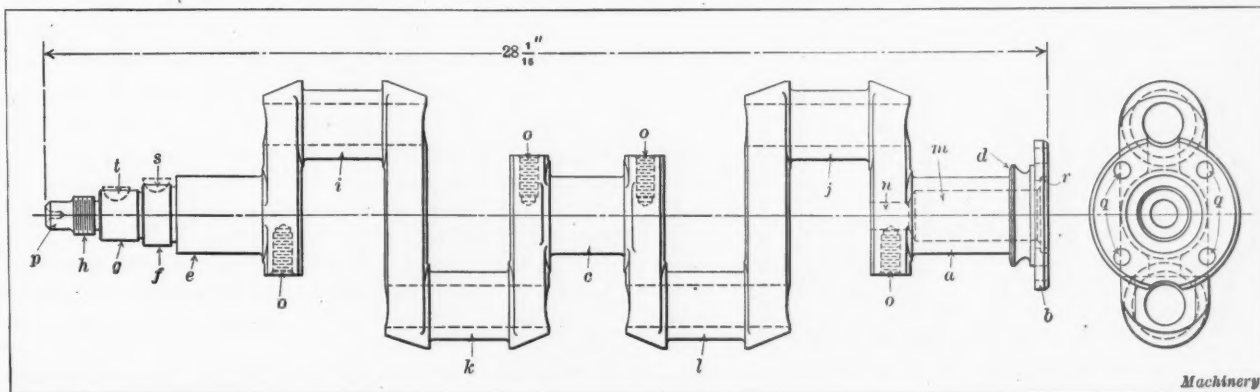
Crankshaft of the Essex Motor, on which Machining Operations are to be performed
